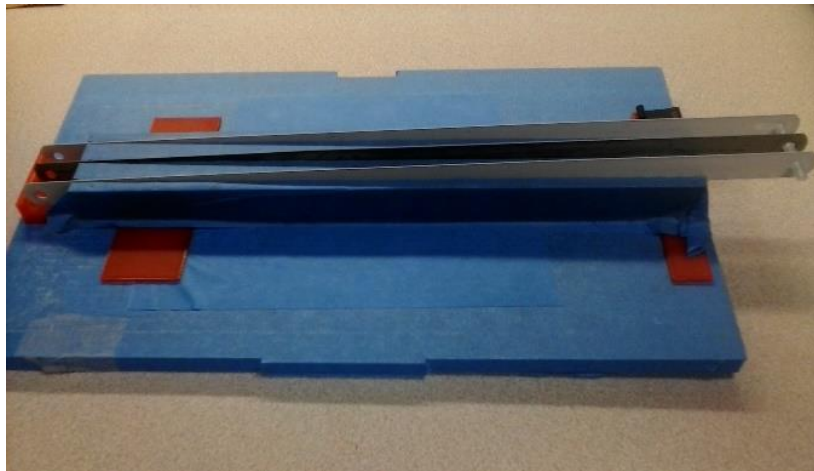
Mechanical part removal system that uses hacksaw blades to lift parts printed on the 3D printed build plate that is covered in blue tape to decrease adhesion
